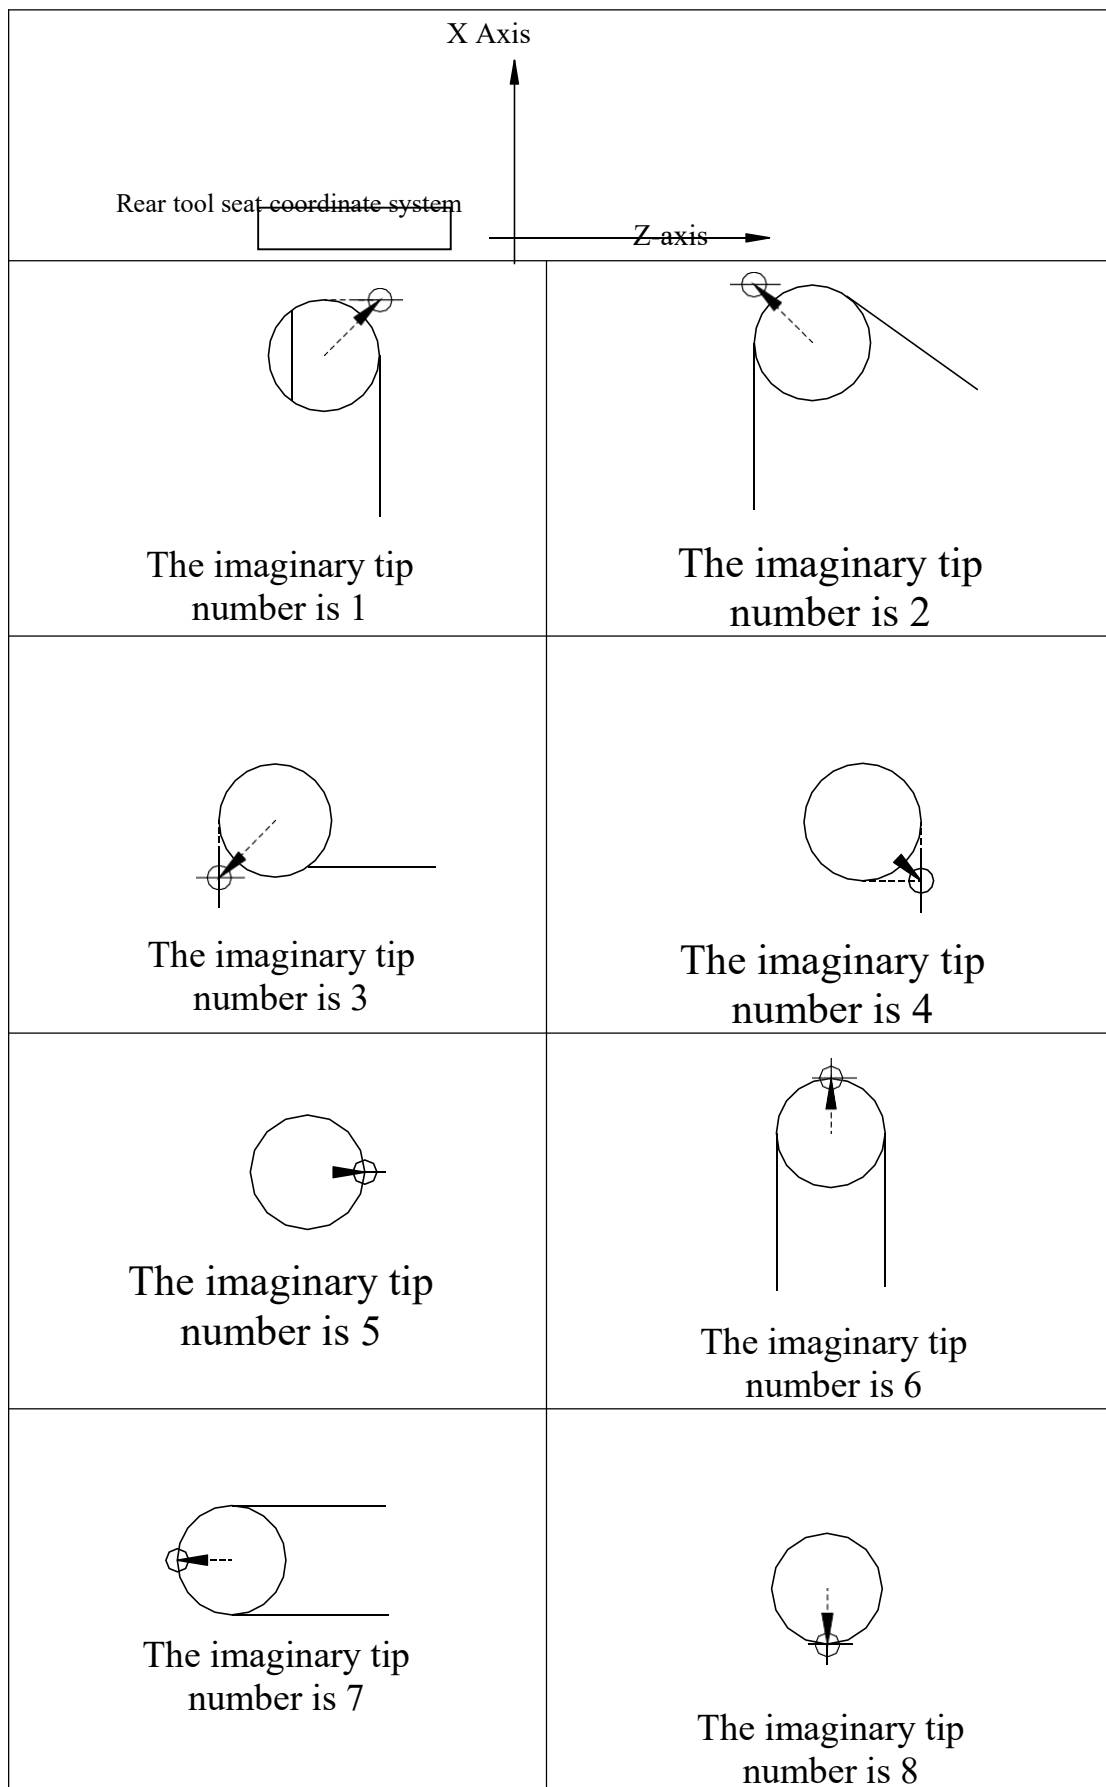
Imaginary tool tip number in rear tool holder coordinate system
